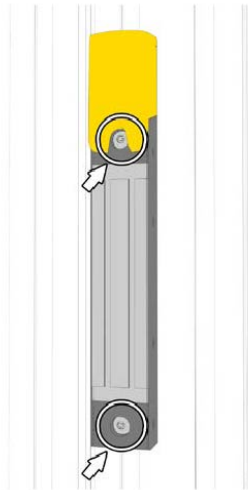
Attach the process guard locking to the profile at the desired height and tighten the Torx screws M6 x 25 mm.
